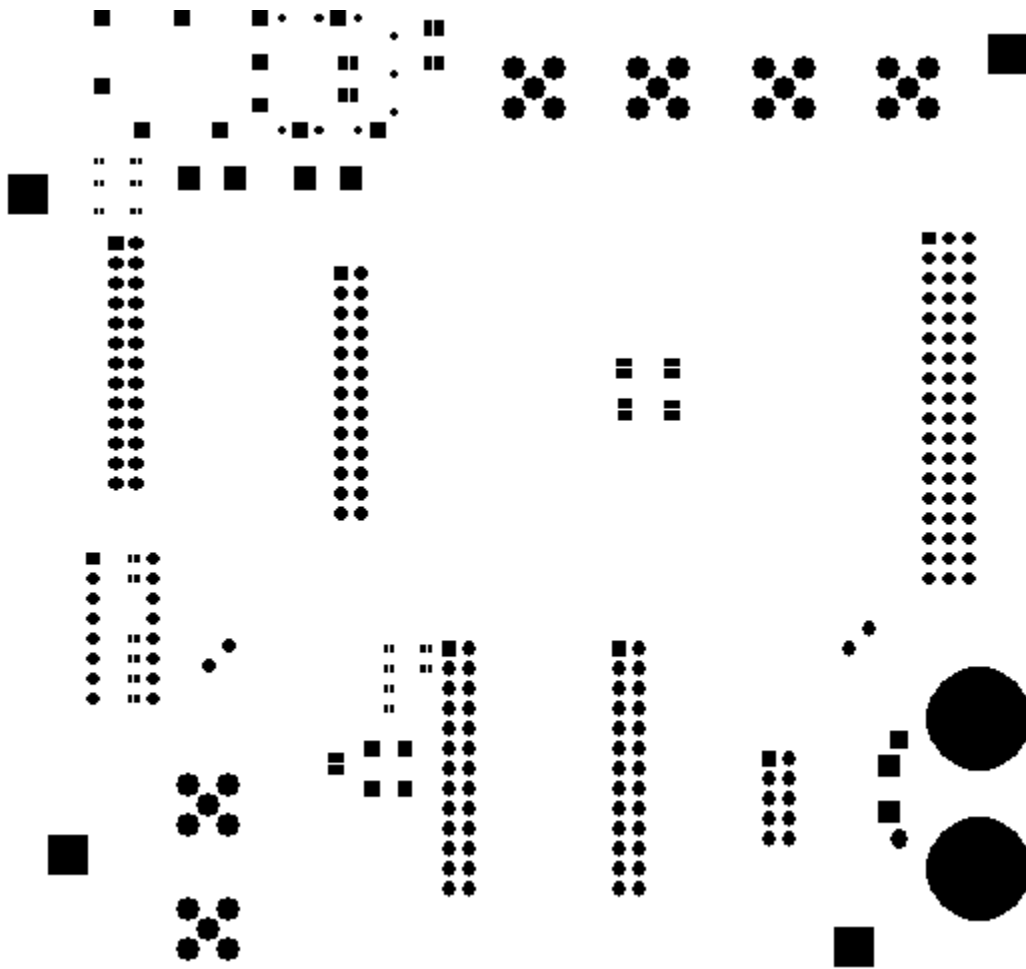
CYP15G0101DXB-EVAL Bottom Layer Solder Mask Layout
